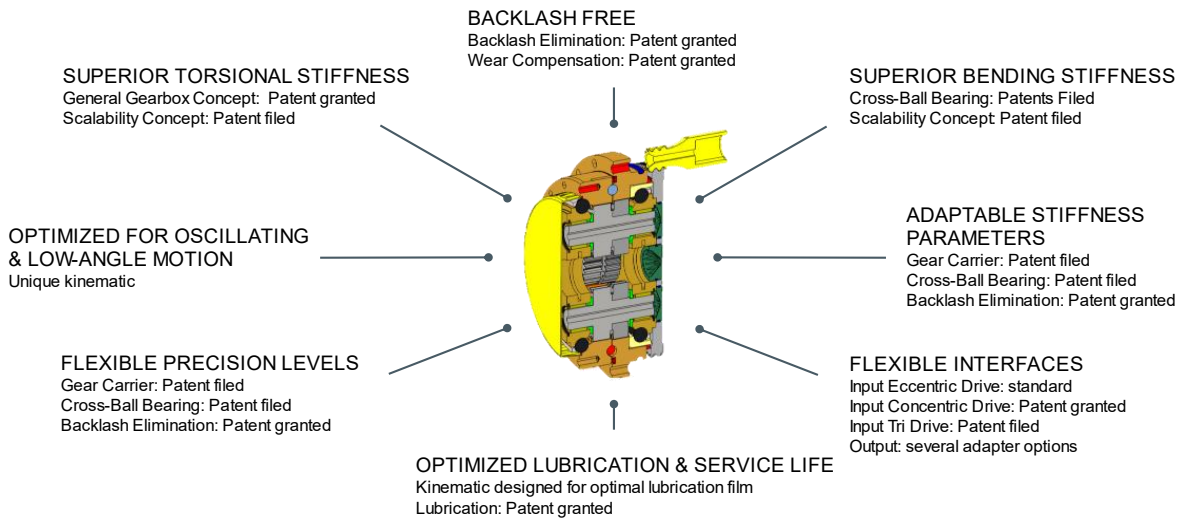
High-precision gearbox SKF Gear Bearing Unit
